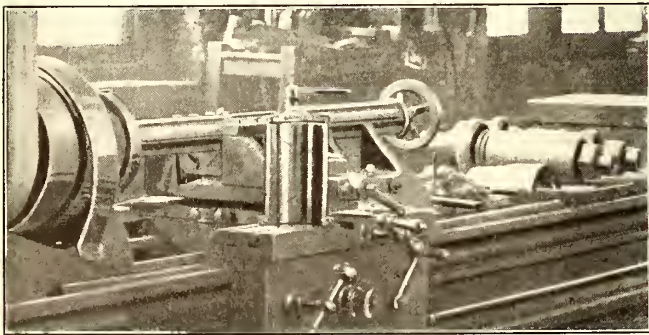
BORING BAR AND MANDRELS FOR USE IN FINISHING BEARINGS
